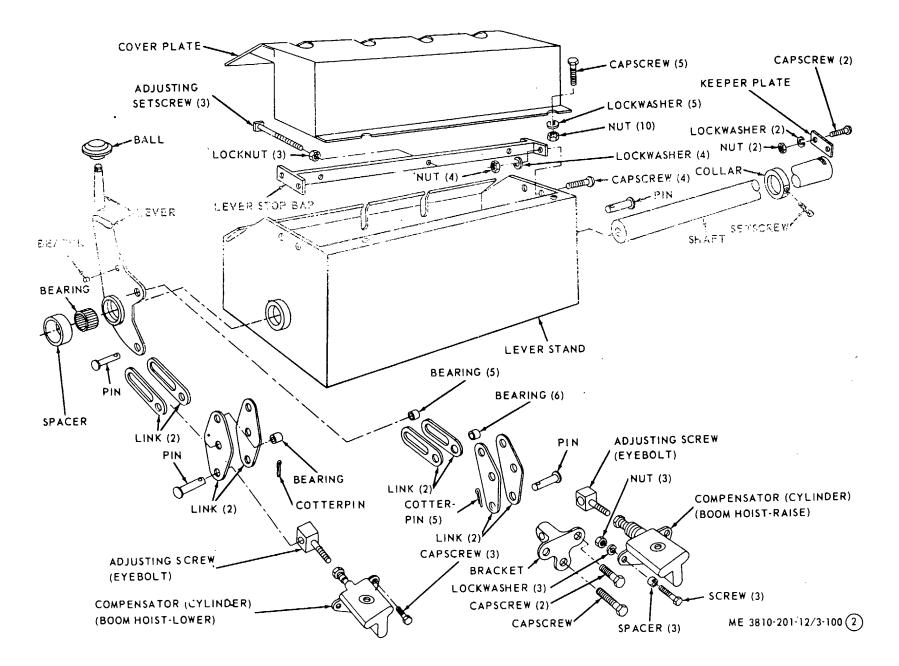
Lever stand showing compensator, lever, pedal, and linkage removal and adjustment points (sheet 2 of 2).
